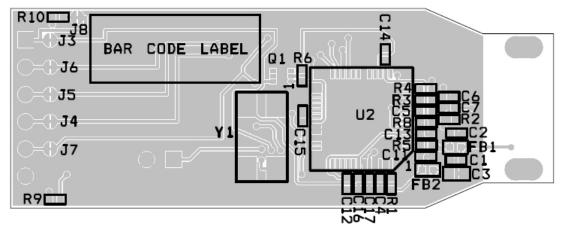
CBC-EVAL-06 Assembly Diagram (Bottom View).
